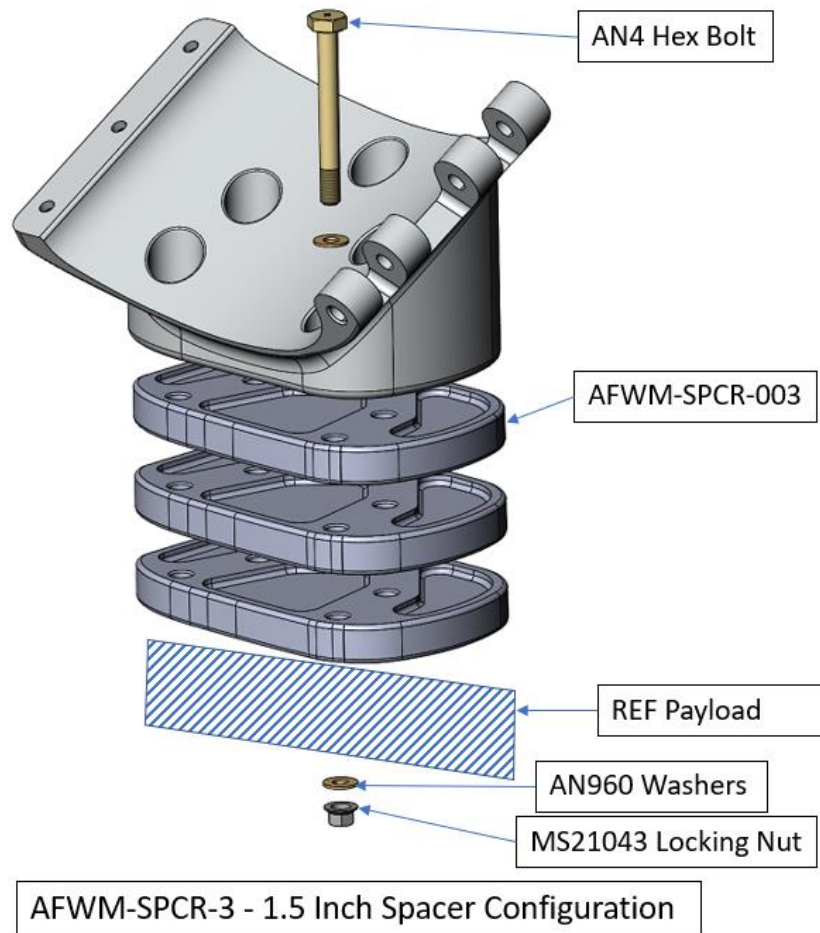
Exploded view of AFWM-SPCR-3 Assembly with Reference Payload Location
